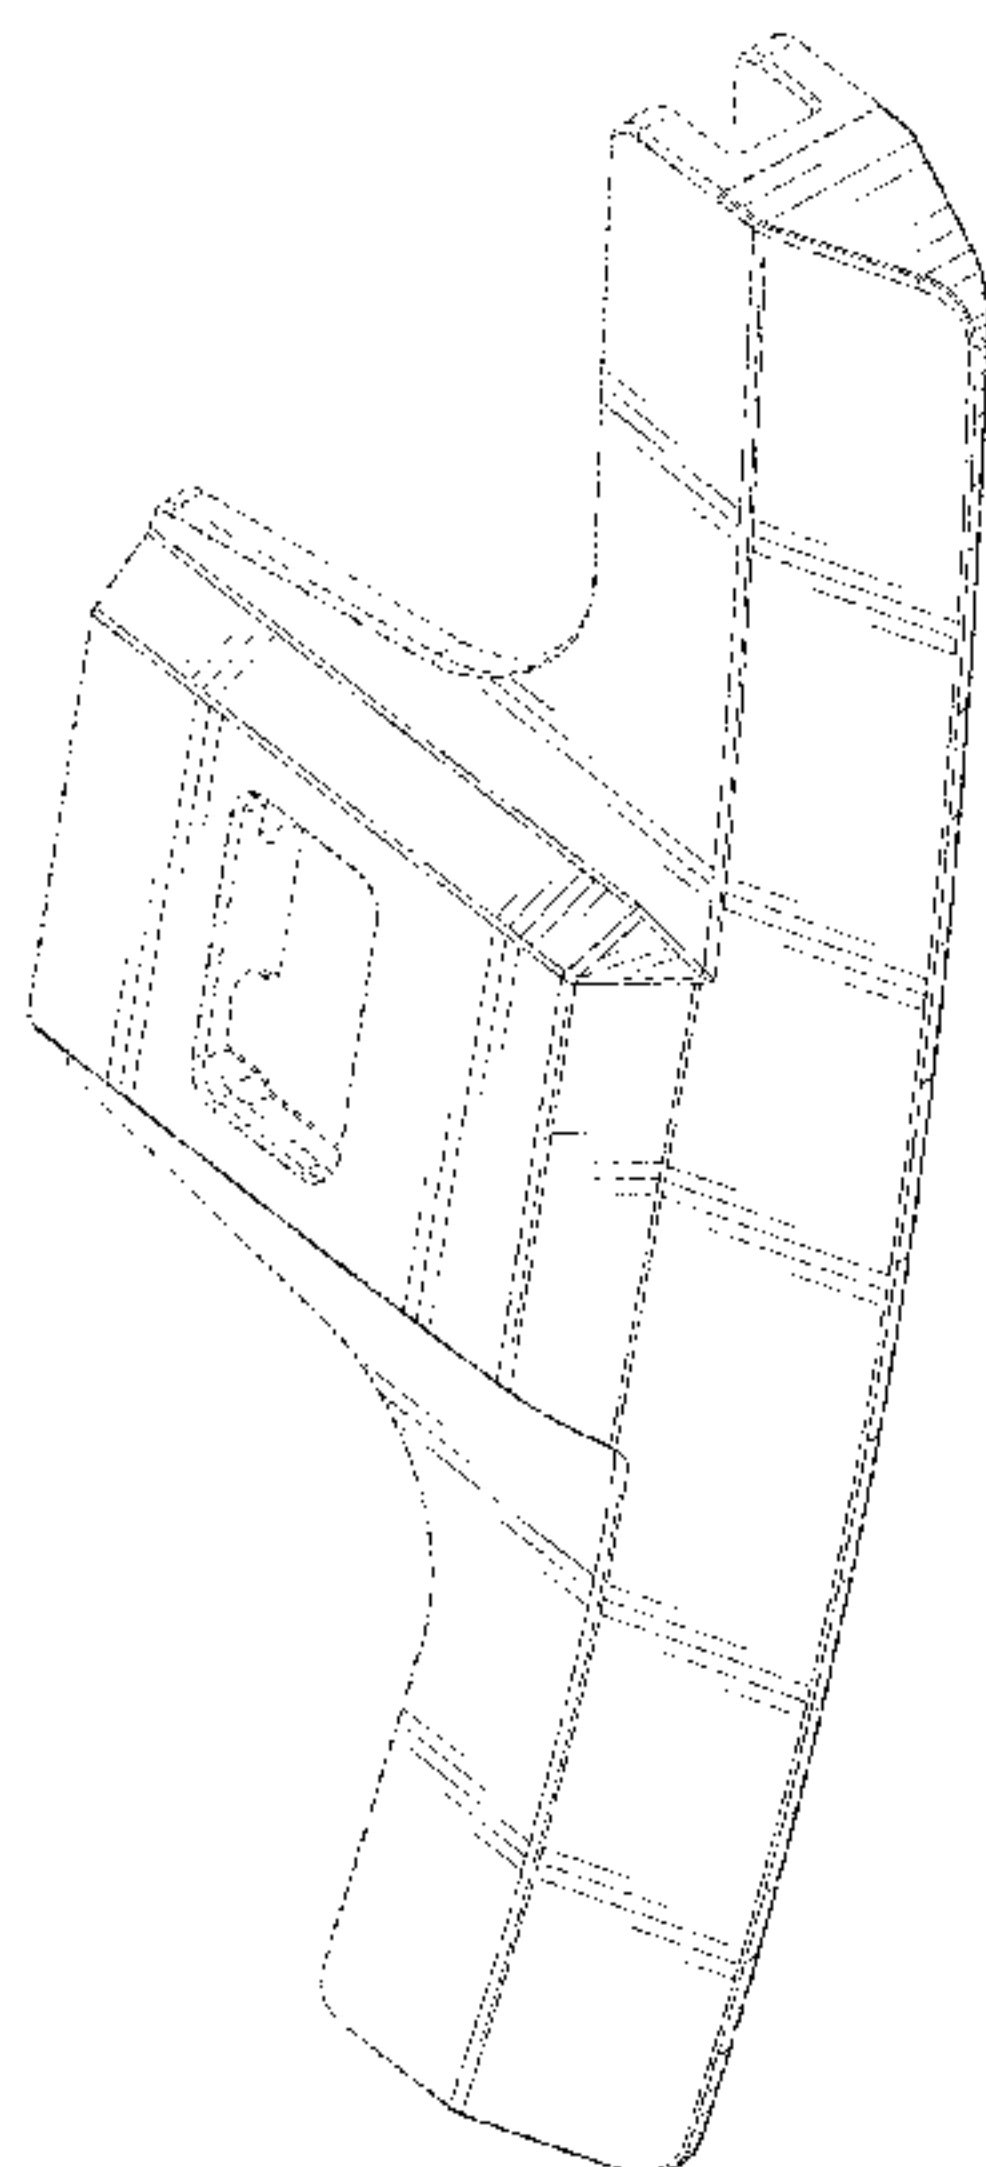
is a front perspective view of a sidebar protector showing our new design;
